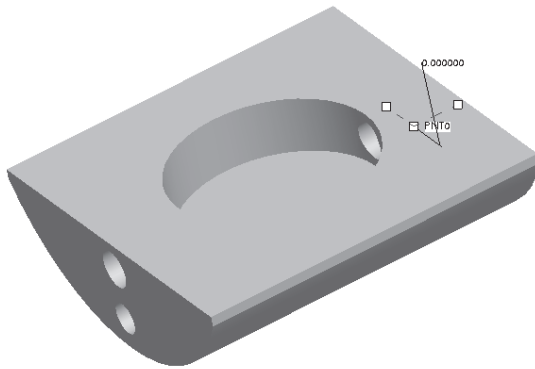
Datum point on the top face with offset 0 and the three drag handles
